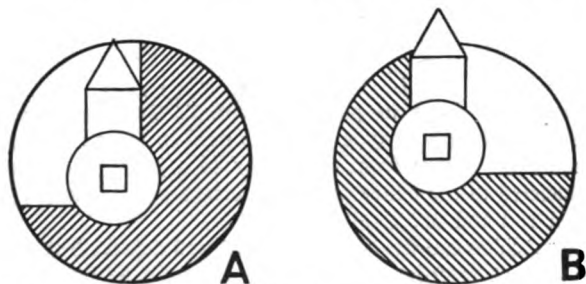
Diagrammatic View, Showing Arrangement of Faessler Cutter.
